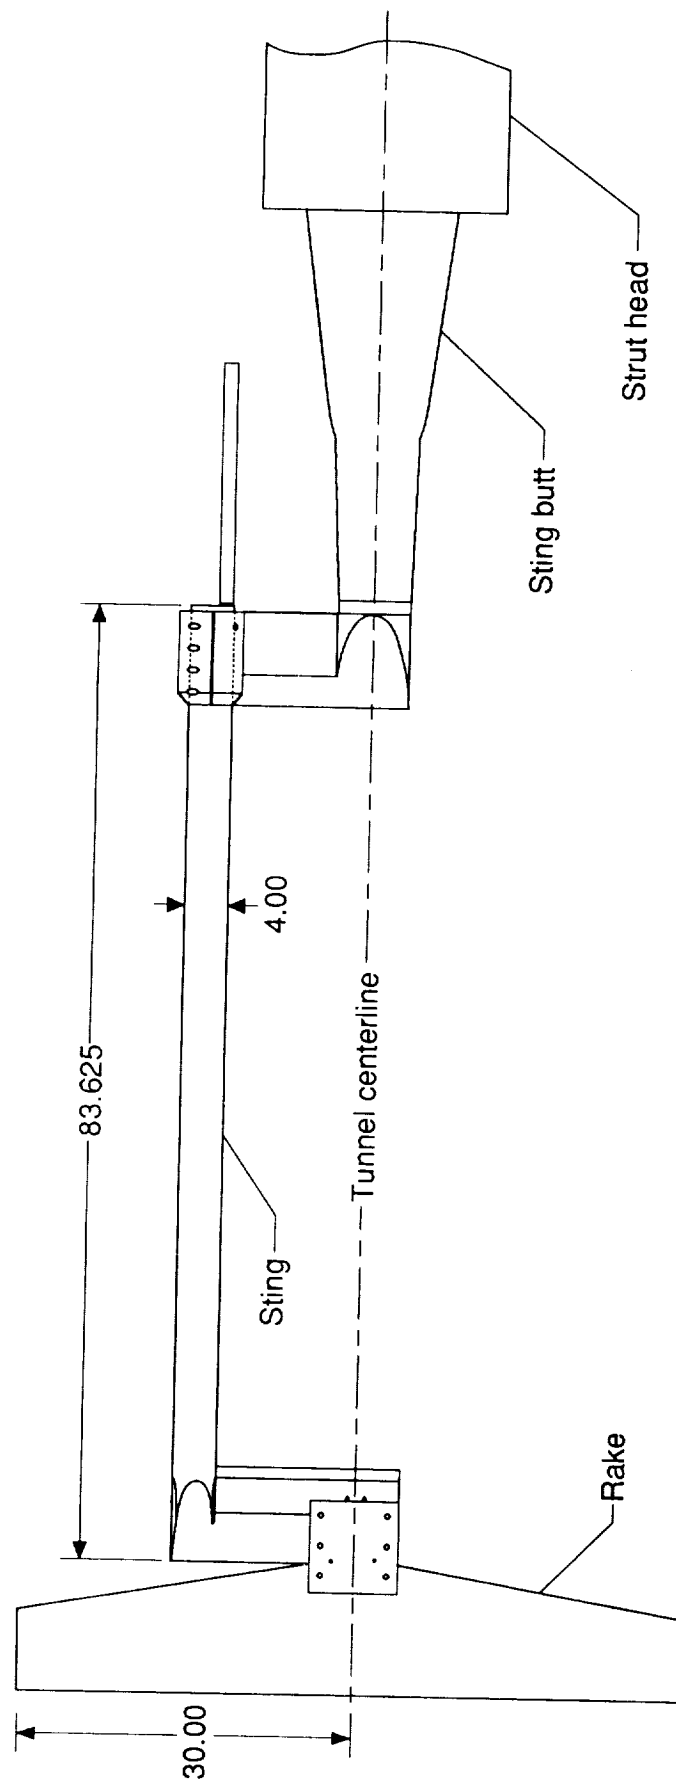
Translating sting attached to strut head. Dimensions shown in inches.
